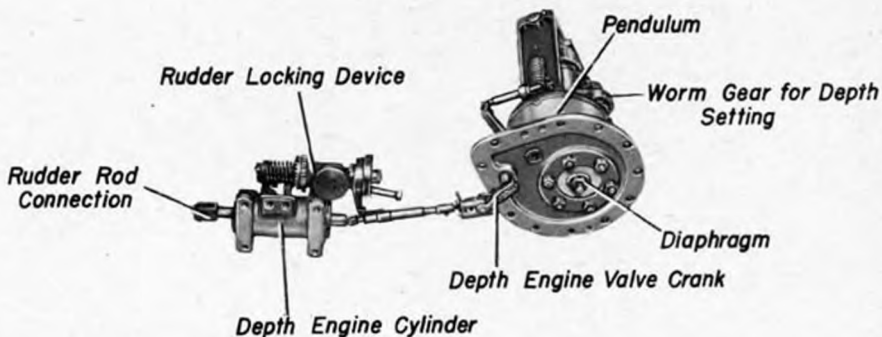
Torpedo Type 91 Mod I, Depth Mechanism
